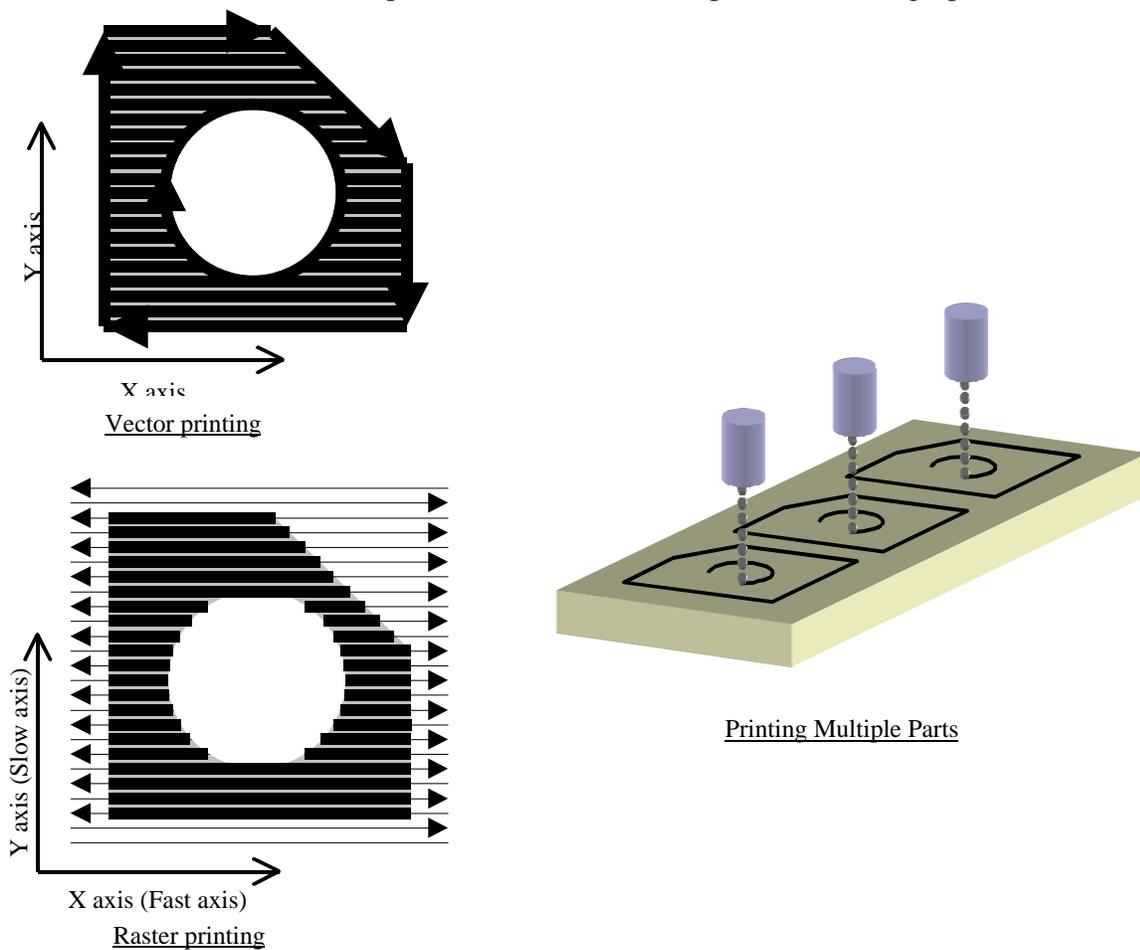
Vector printing of the outline of a part, as illustrated in the upper left hand drawing is a good approach to high quality parts, when the parts are small in size. On the right is an illustration of simultaneous printing of three identical parts, each addressed by its own individual ink-jet.
